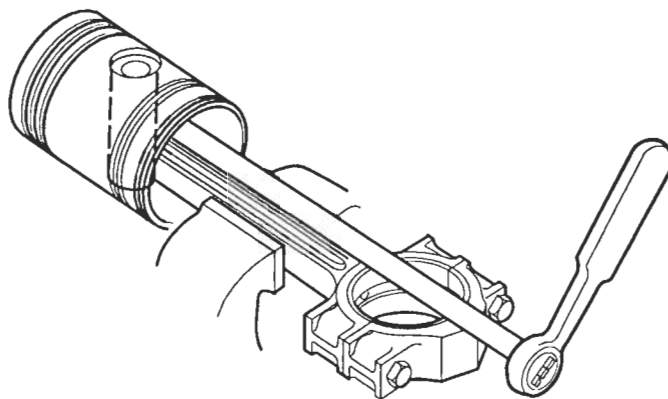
Tightening Connecting Rod to Piston Pin Bolts
